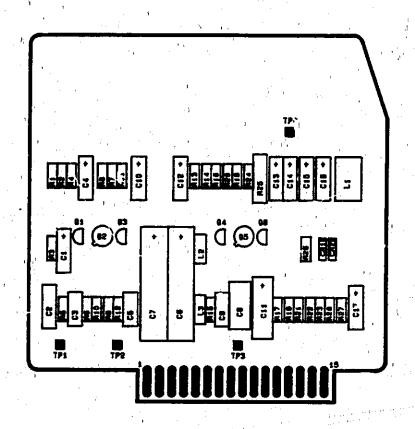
A. A9 Voltmeter Assembly Component Identification (CHANGE 21)
